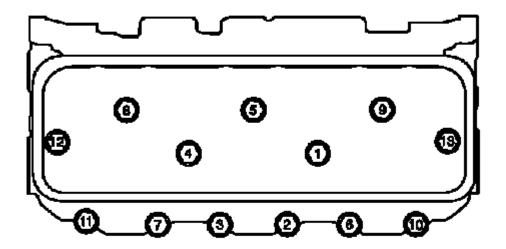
Identifying Cylinder Head Bolt Tightening Sequence Courtesy of GENERAL MOTORS CORP.
